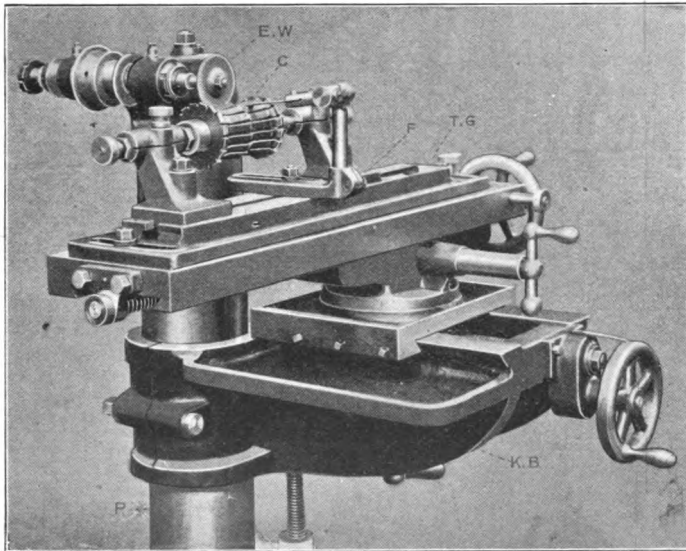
"Ward" Cutter Grinder. Sharpening an Involute Cutter.
